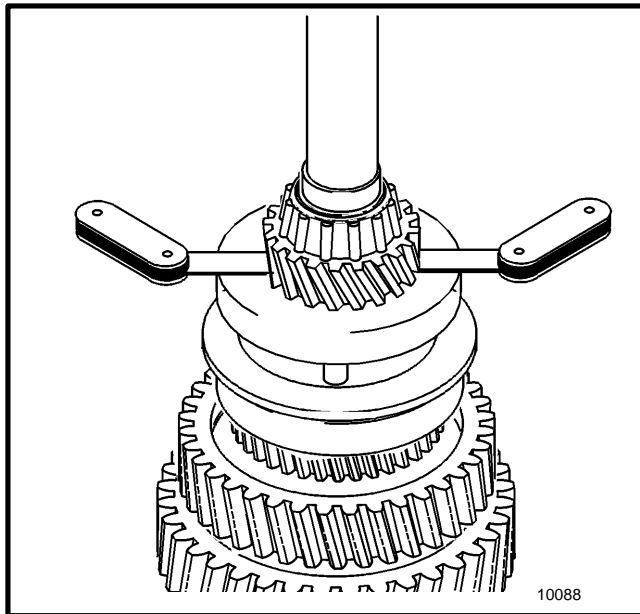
CHECK THE CLEARANCE BETWEEN THE STOP RING AND GEAR
